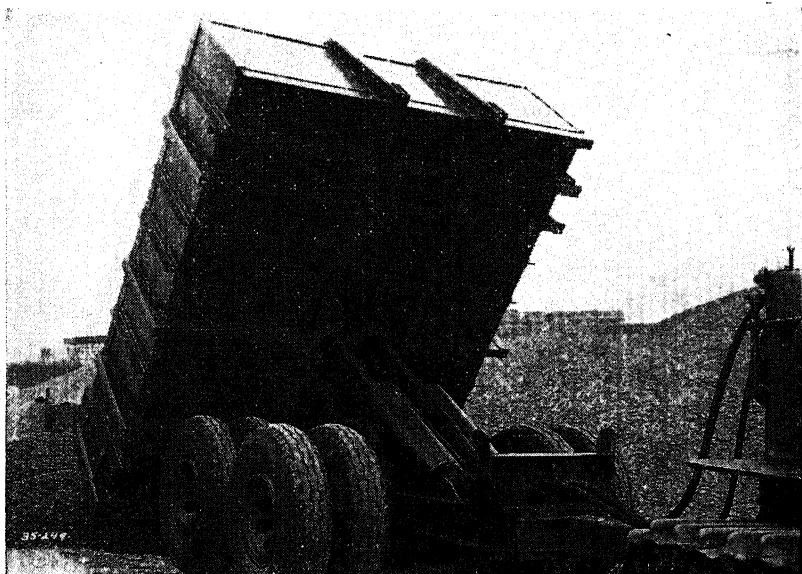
End dump "Karry Buggy" of all welded steel construction. Full load capacity 30 yards. Smooth interior facilitates unloading. Welded design increases payload and minimizes maintenance.
